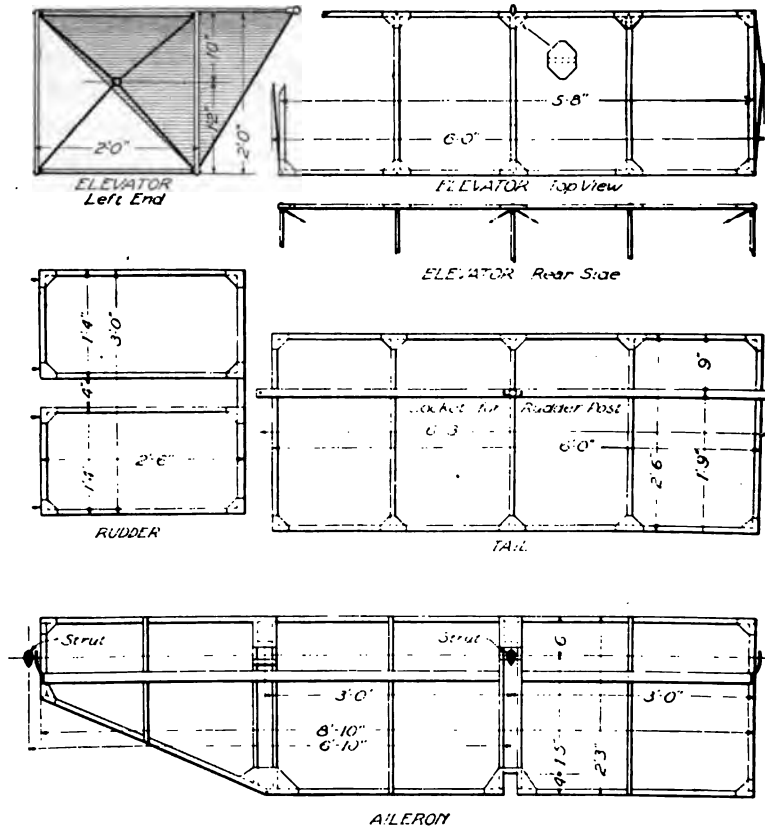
Details of Rudders and Ailerons, Curtiss Biplane
